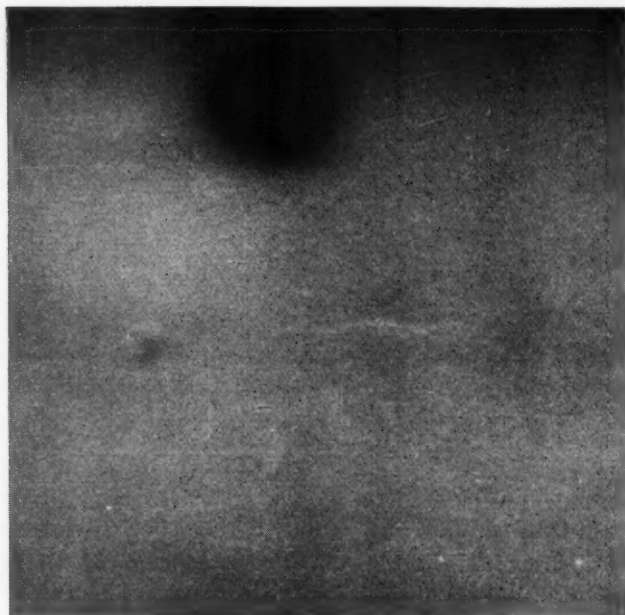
X-ray photograph showing crack encountered in experimental weld on 2½ inch plate.
